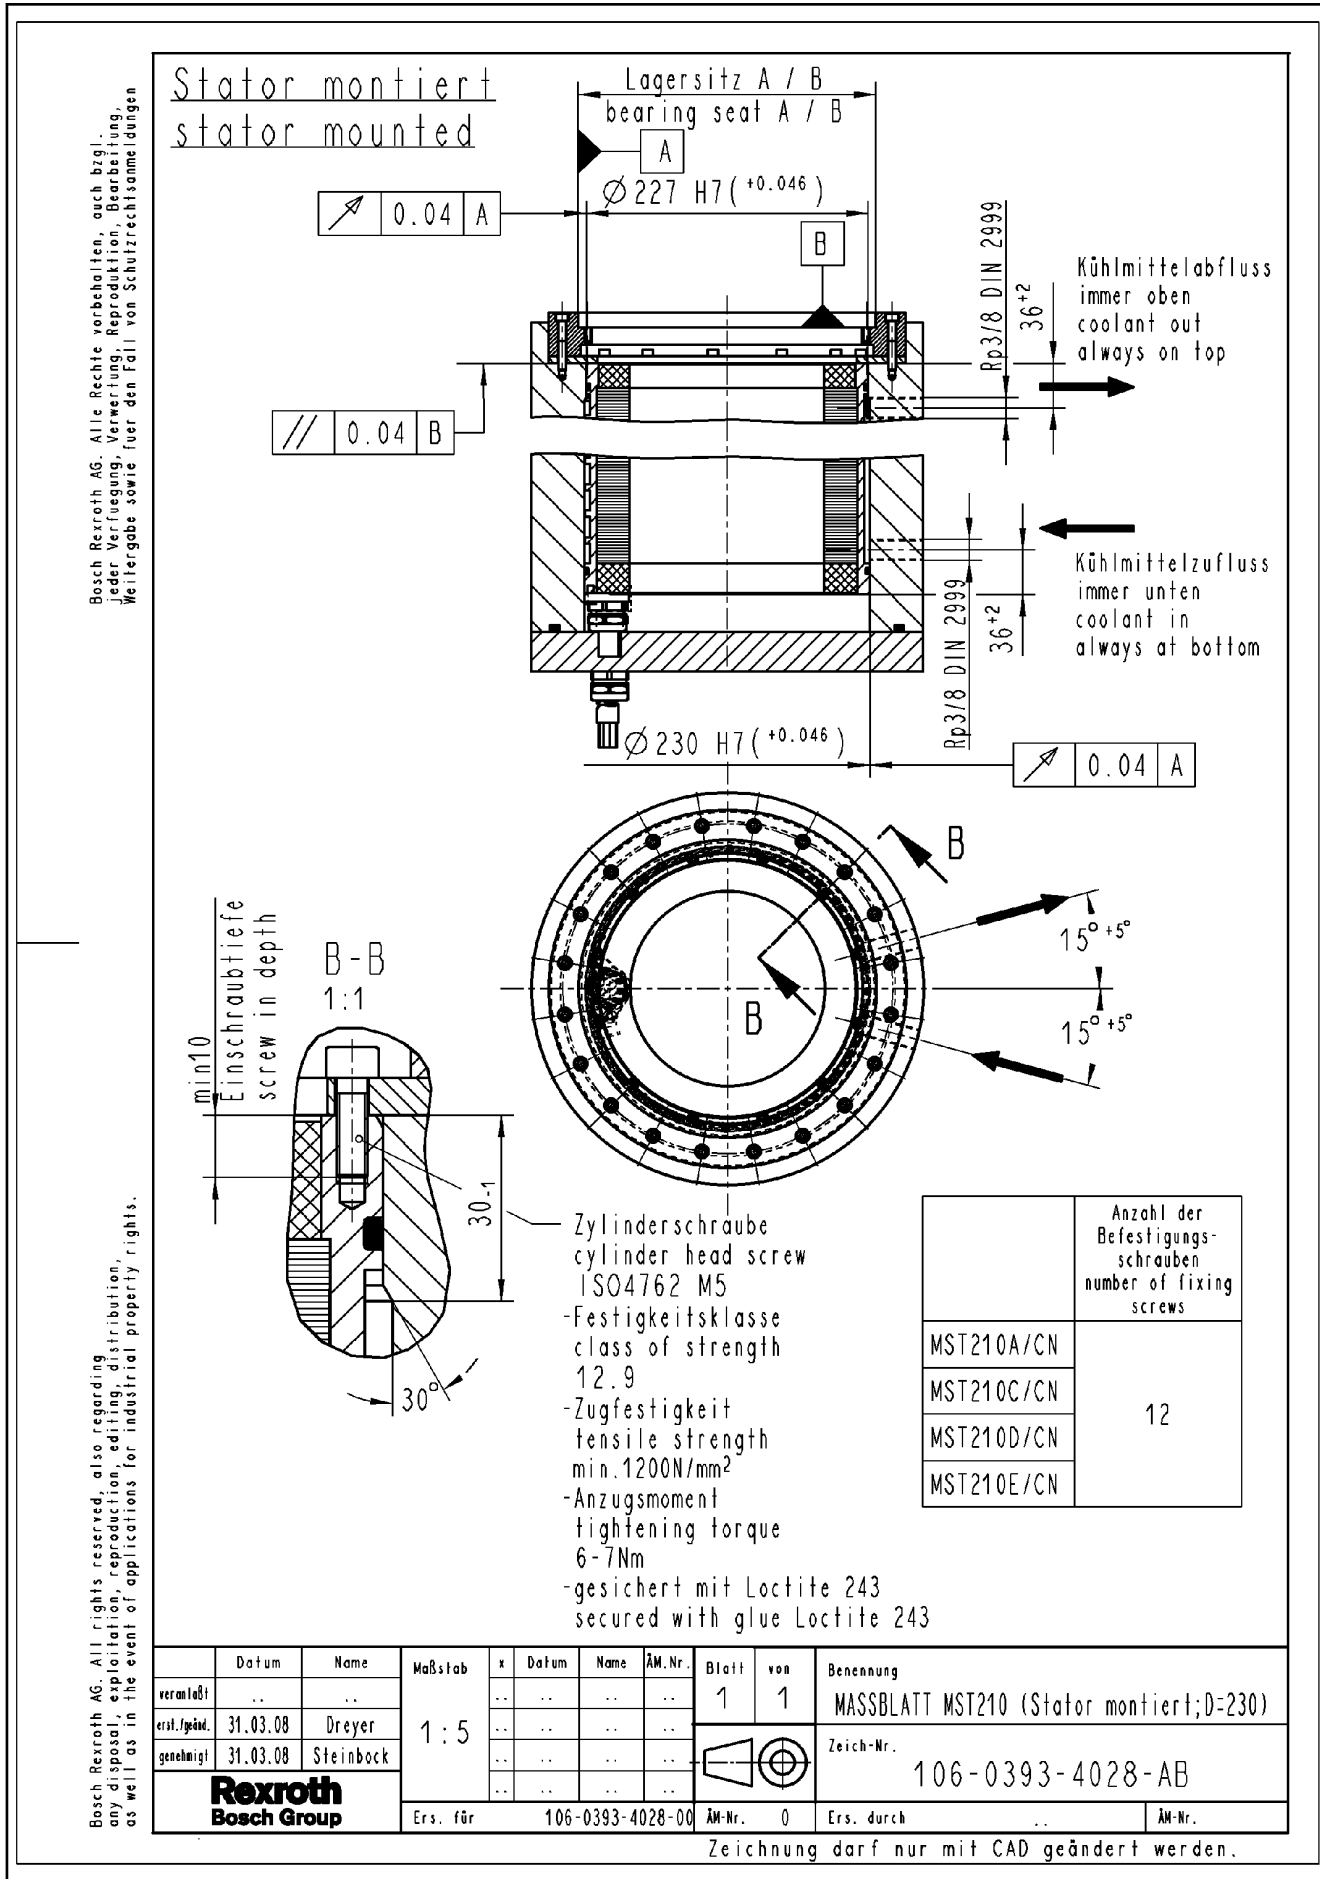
Dimension sheet for stator MST210, mounted ("CN")
